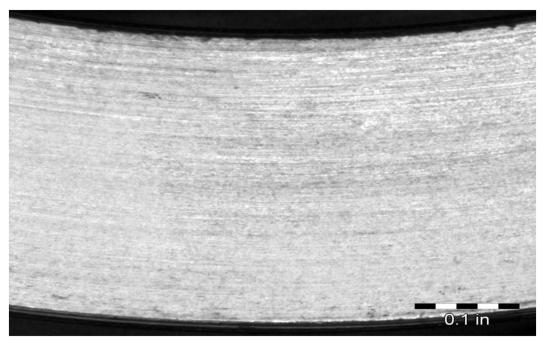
Close-up of the machined surface on the side of Incoloy 825 C-ring at 110X
